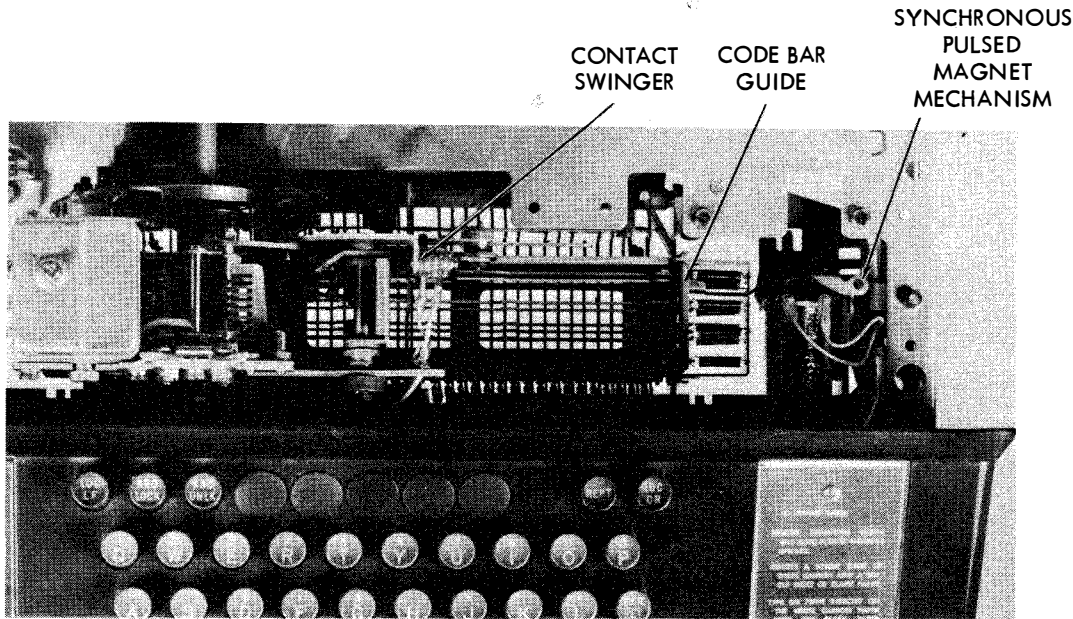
Keyboard-Base (Top View, TT-253A/UG)
